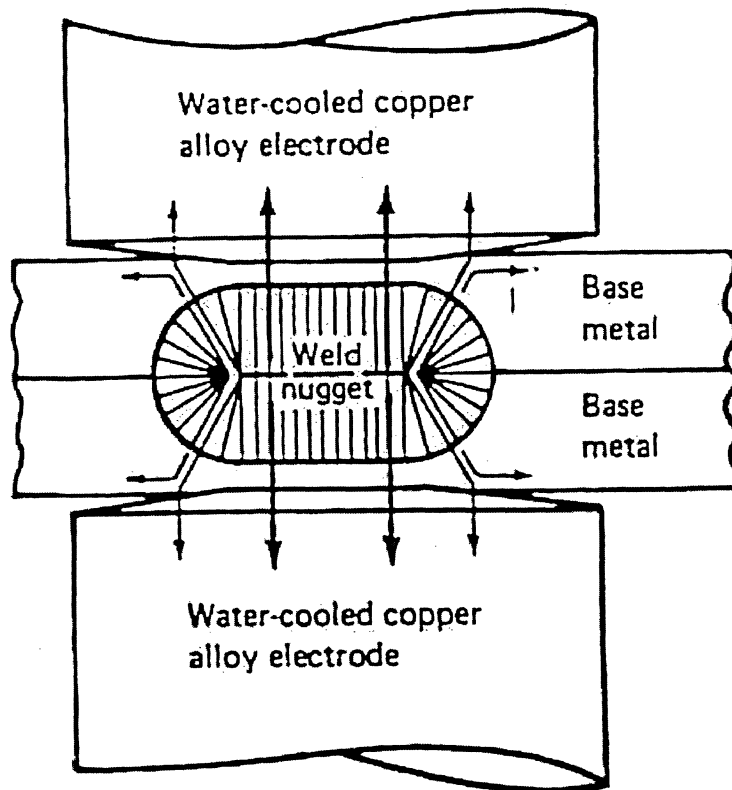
Principle of resistance-spot welding¹⁶
